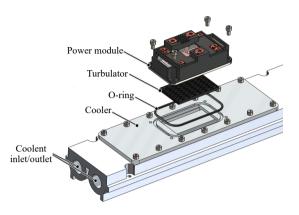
3D-CAD exploded view of thermal management system for a designed MV power stack. [D]
